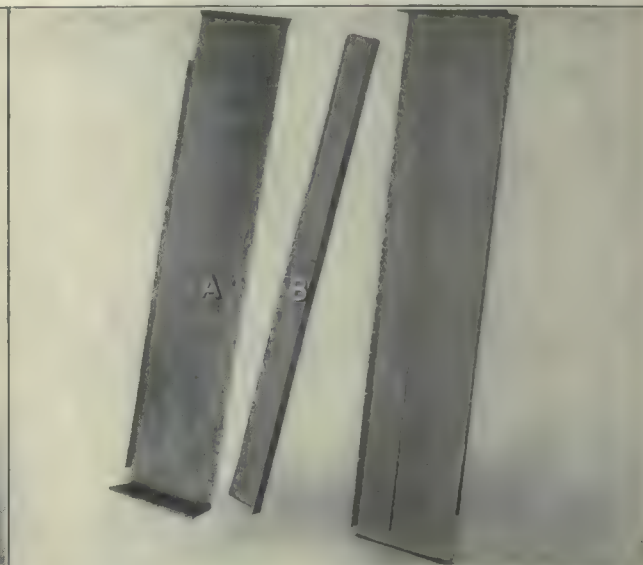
SPOT-WELDING OPERATIONS ON UPRIGHTS
